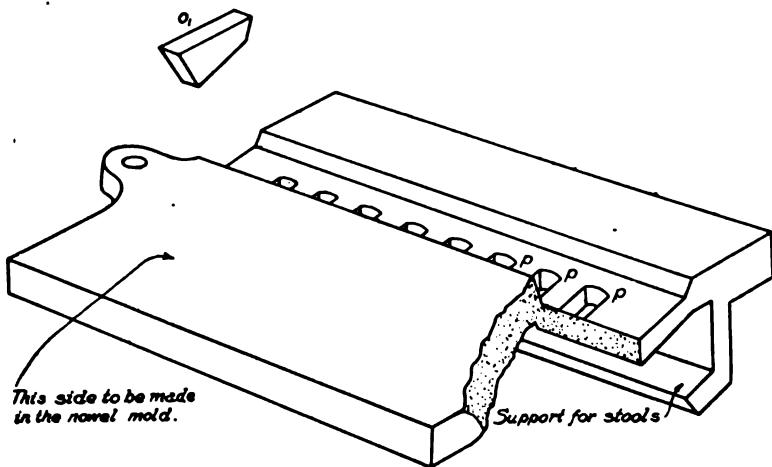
Diagram of Stripping Plate, One End Broken to Show Holes through Which Pattern Is Drawn
